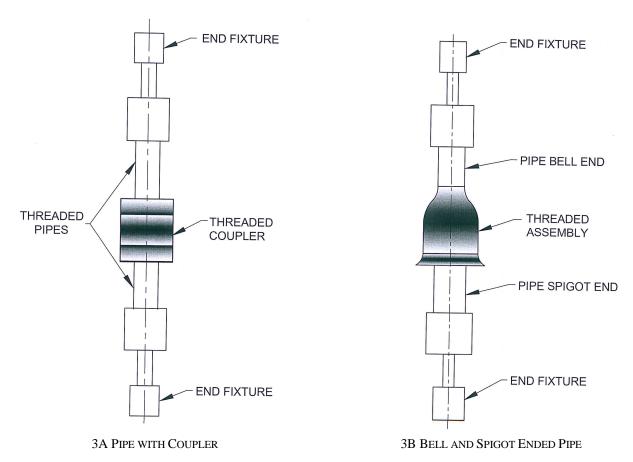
TYPICAL ULTIMATE BREAKING LOAD ASSEMBLY
